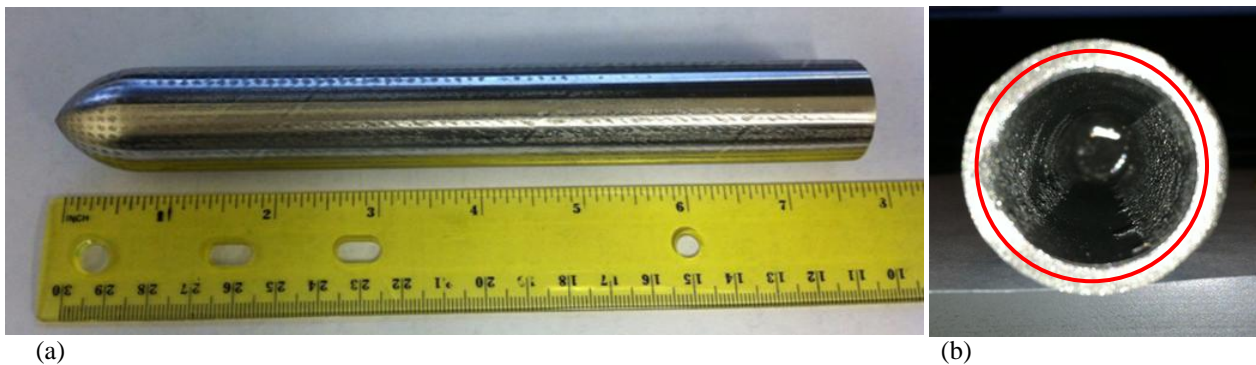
Preliminary Warhead, CRH = 1.0 shape. (a) Initial warhead prototype, side view. Warhead length = 7.5 in. Surface finish was shot peened and brushed. (b) Initial prototype, back view. Radius = 1.0 in. Note the CRH = 1.0 warhead shape. Red circle is exact with radius = 0.9 in. It helps to demonstrate the slightly out-of-round nature of the printed warhead.
